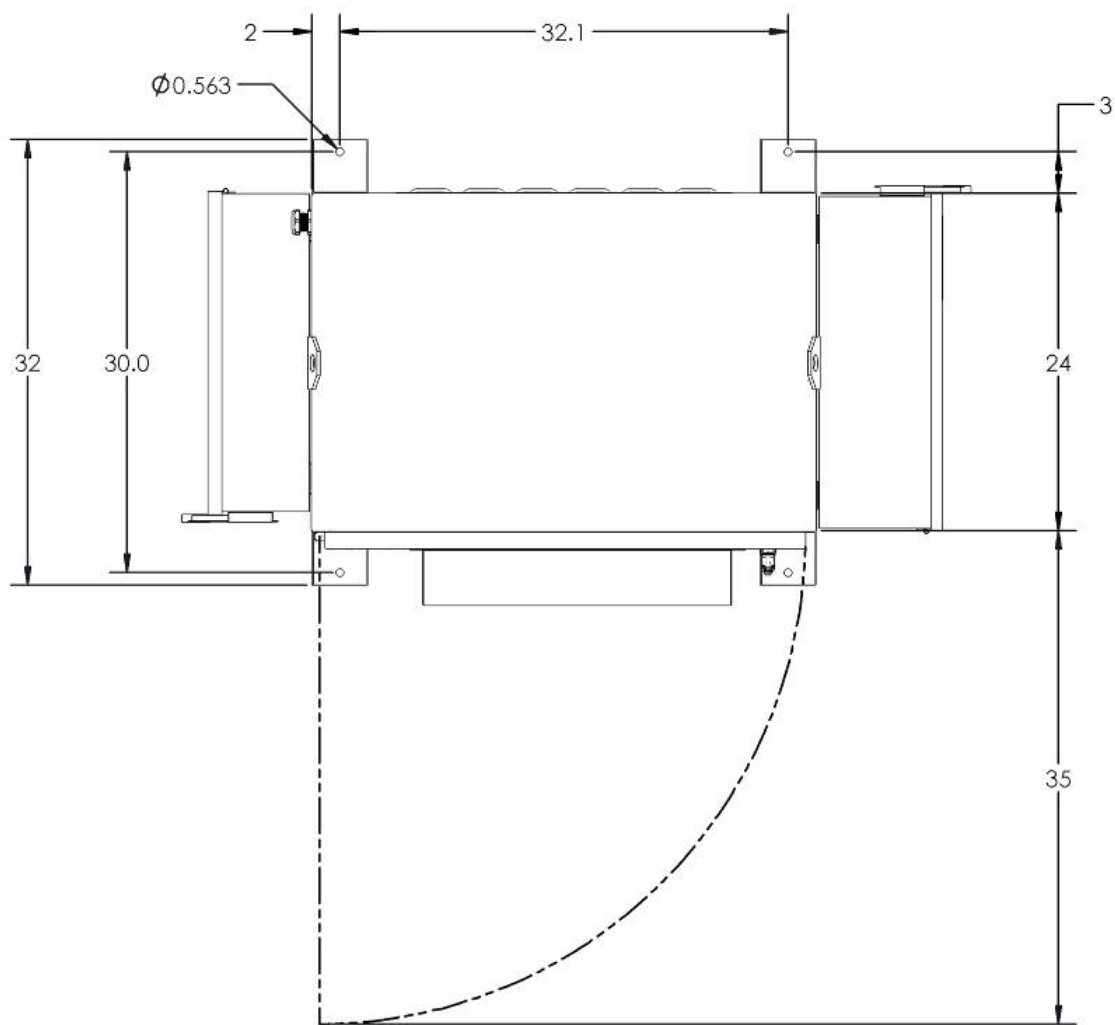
Mounting Hole Diagram (View from top of Inverter)
